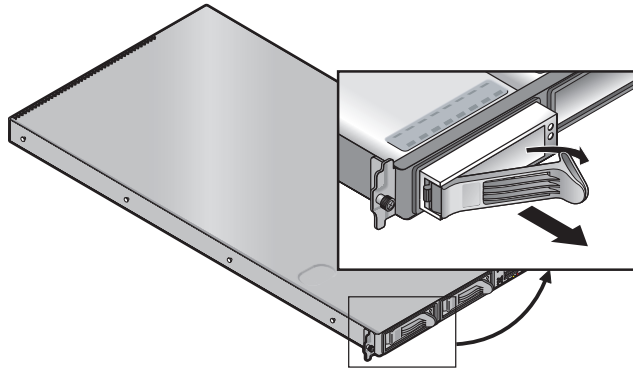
SCSI Hard Disk Drive Carrier and Latch Release
